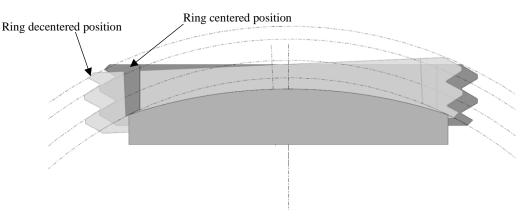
Threaded ring rocking motion within the thread assembly clearance.
